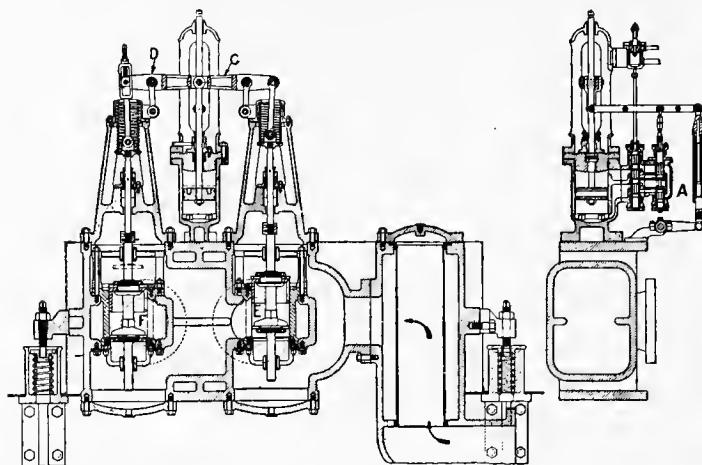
Valve gear with oil relay, Westinghouse turbine.
